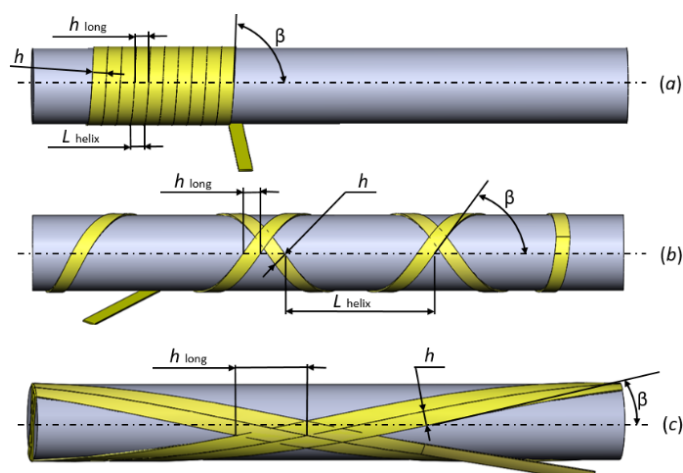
Schematic representation of three types of winding patterns: (a) is the circumferential winding; (b) and (c) are polar winding
